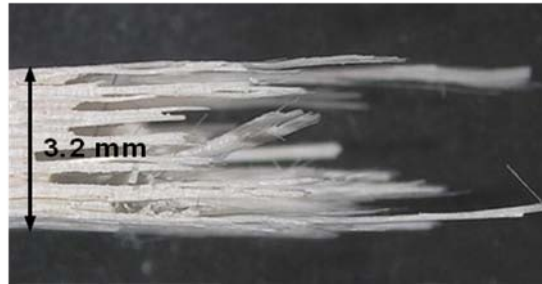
Fracture surface of the N720/AM specimen tested in creep at 131 MPa in laboratory air at 1100°C (side view).
